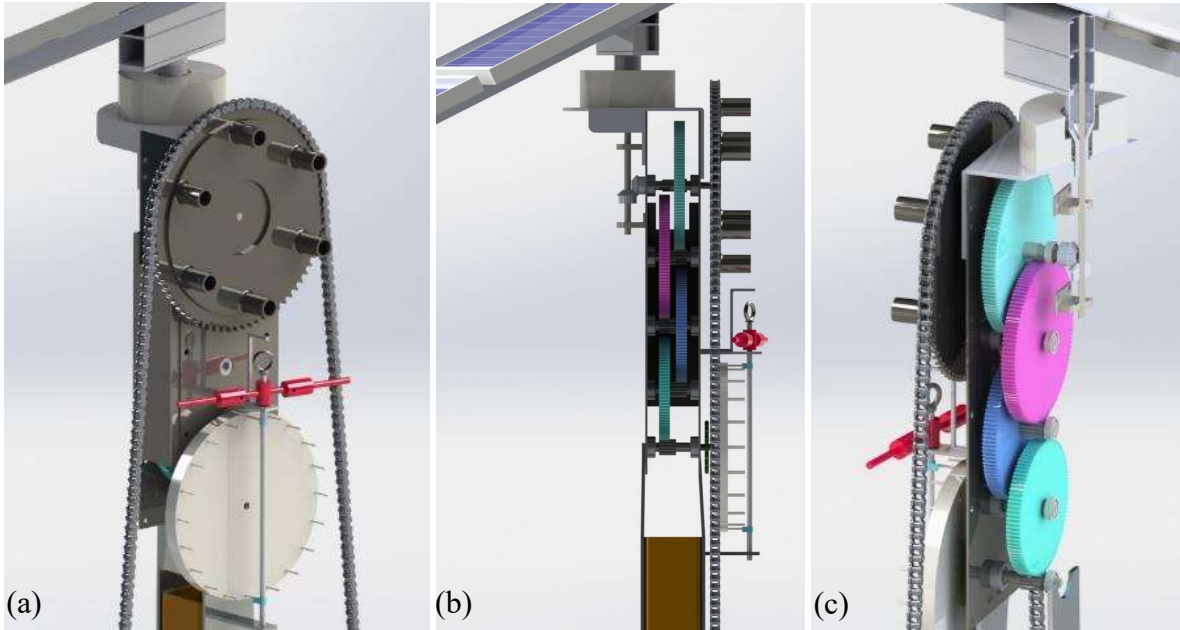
Details of the tracking prototype in 3D design software, views: (a) rear (step control), (b) side, and (c) cross-section (internal gears).
